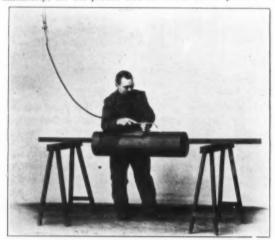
WELDING WITH OXY-HYDROGEN FLAME,
